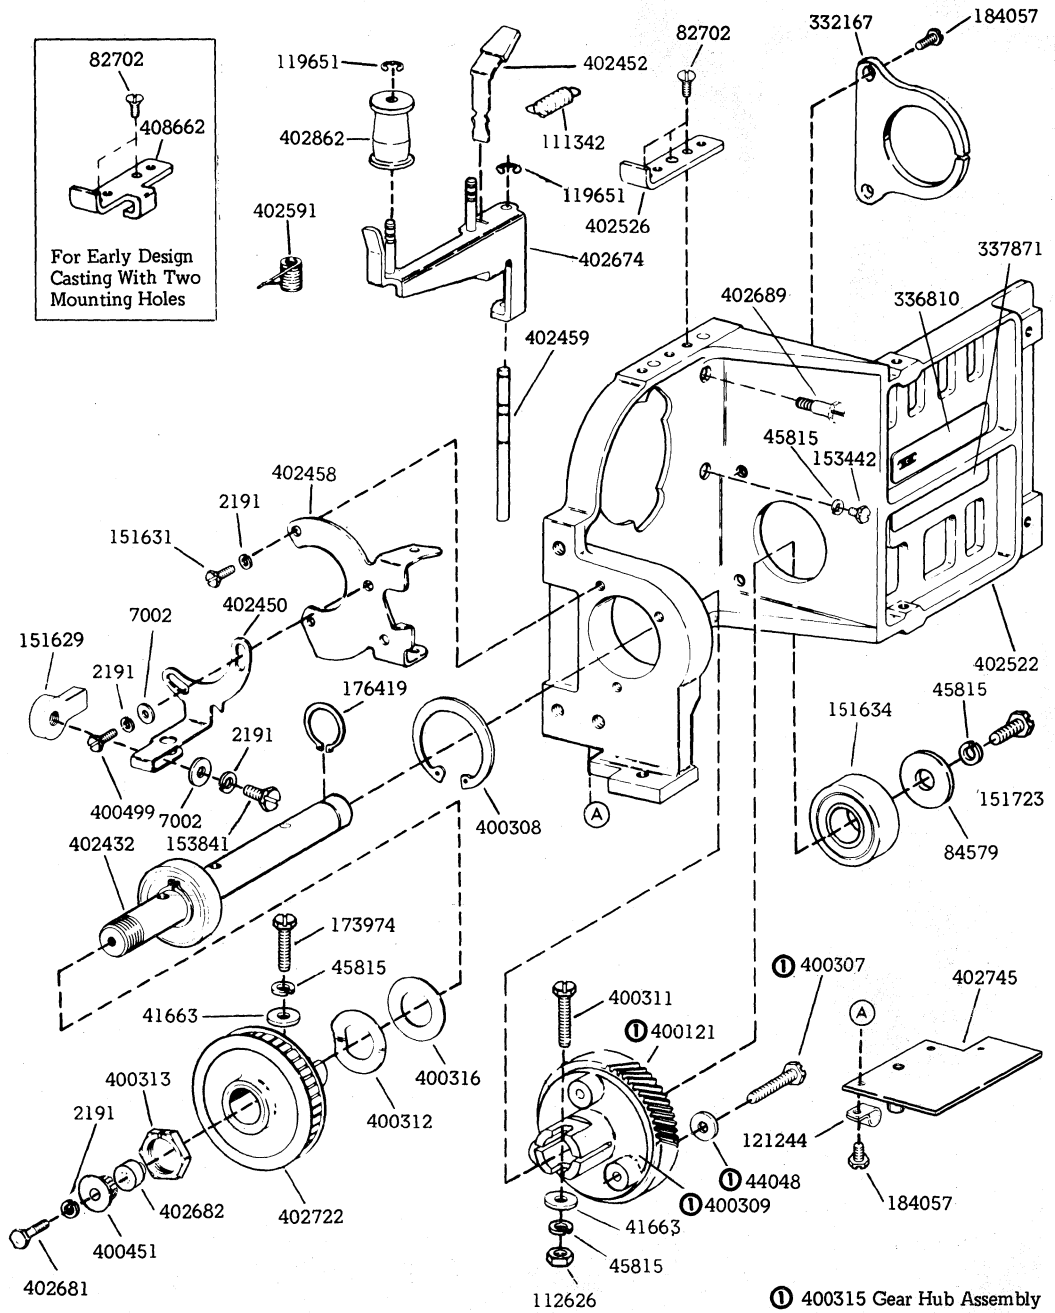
Right Casting Assembly (Tractor Feed - 132-Column)
